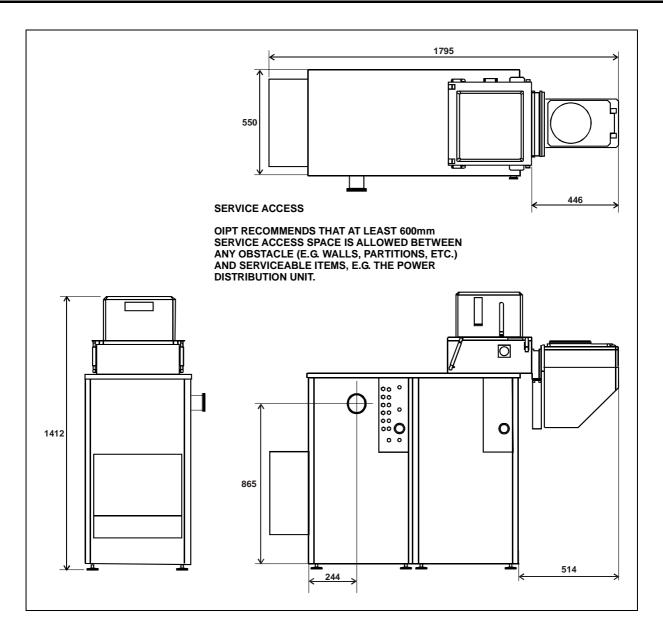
PECVD Layout (2-frame cluster upgradeable)
